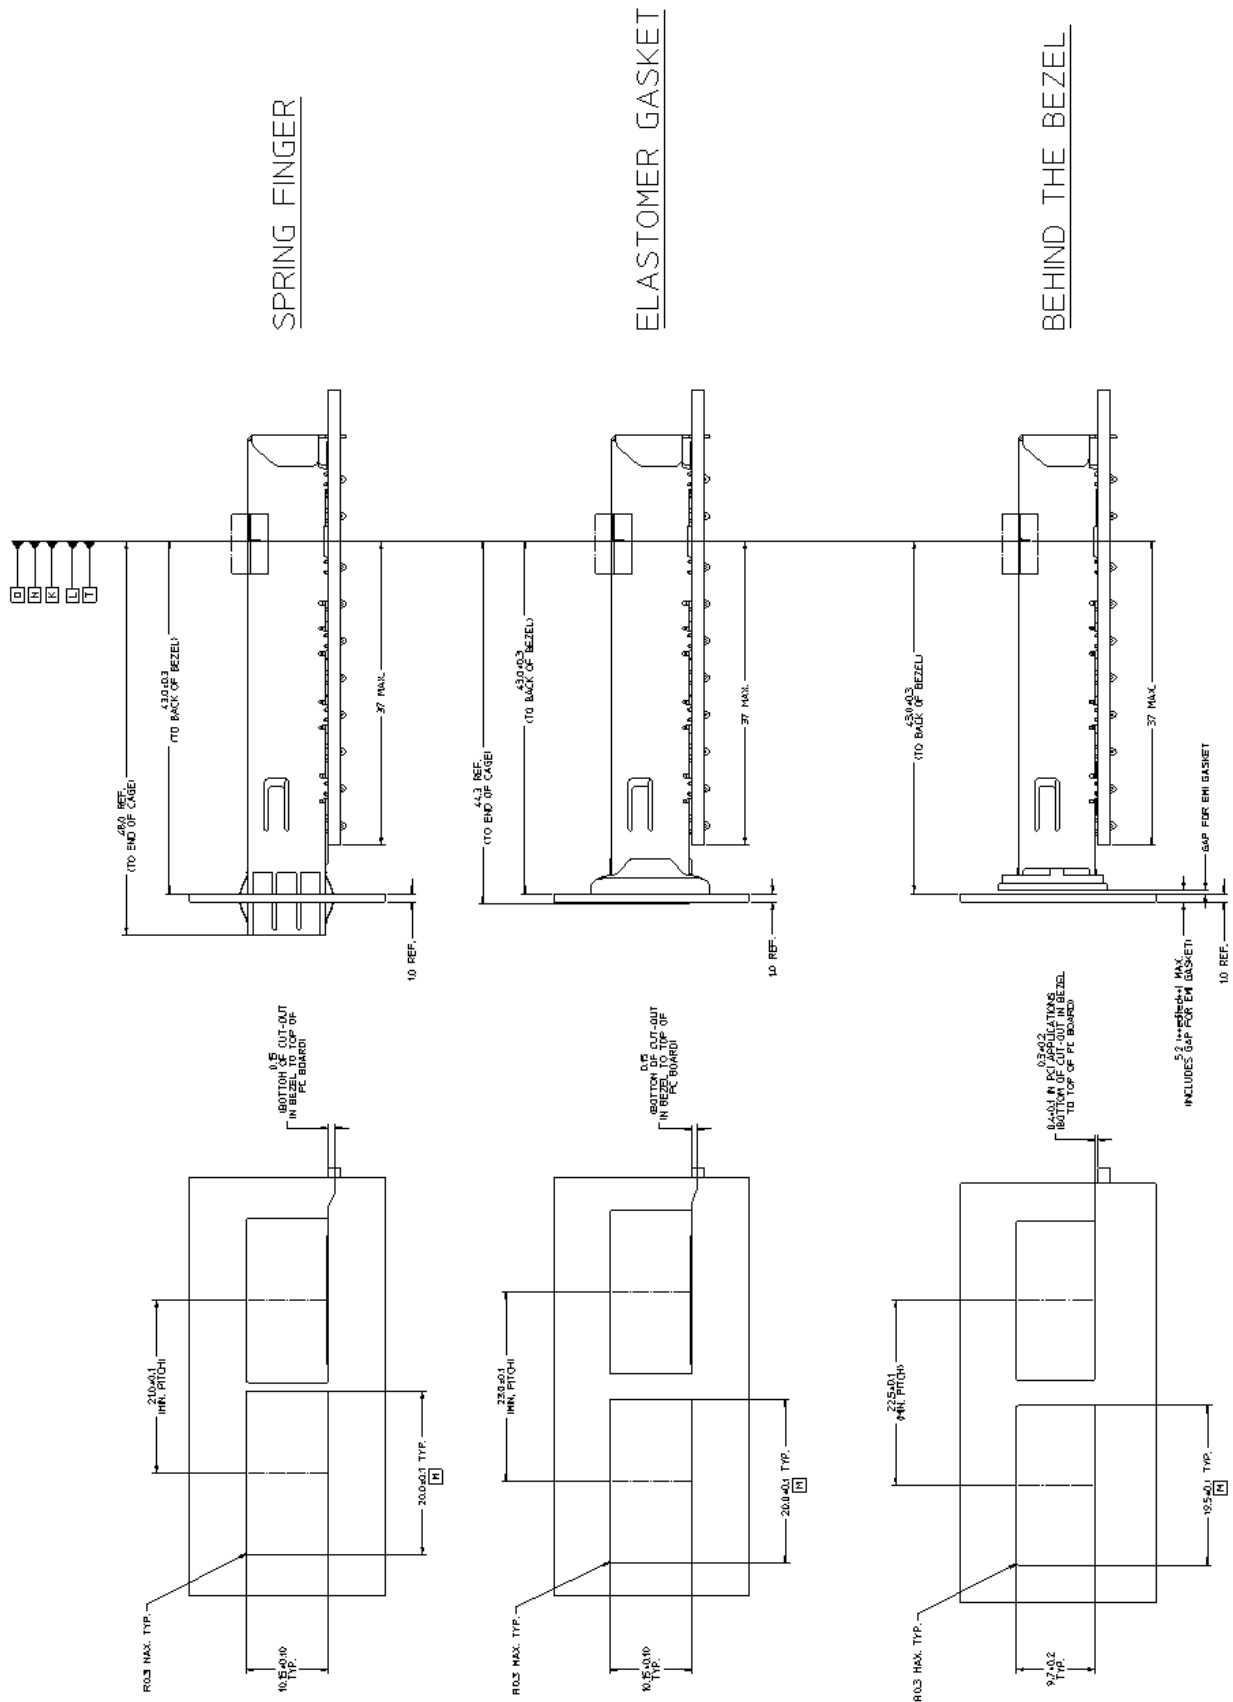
CAGE TO BEZEL DIMENSIONING AND BEZEL OPENINGS FOR SINGLE CAGES
